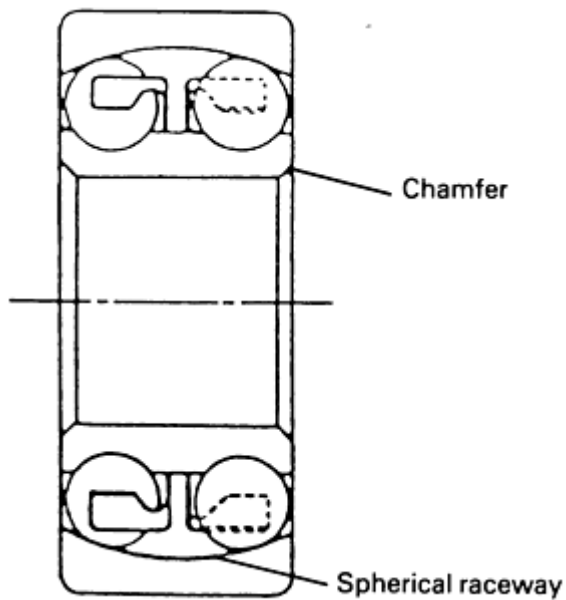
Typical construction of a self-aligning ball bearing incorporating a spherically shaped outer raceway
